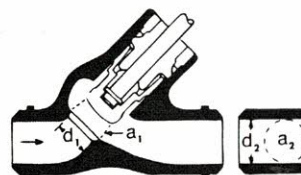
45° Y-pattern angled globe valve (courtesy of Crane Valve Co.).
